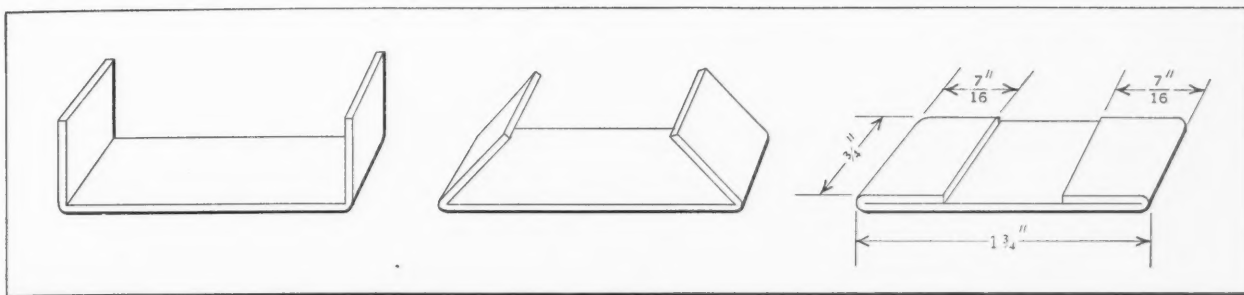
Three Steps in Forming Aluminum Part in Die Shown in Fig. 2
